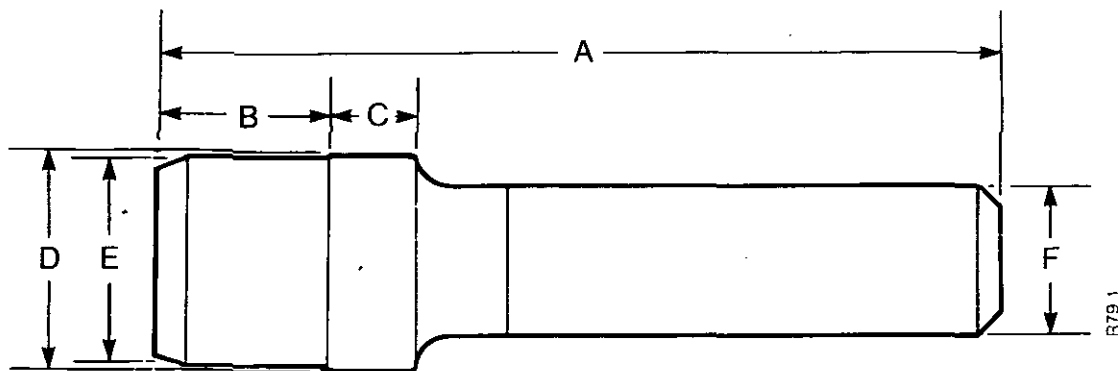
TOOL FOR REMOVING BUSHES FROM
